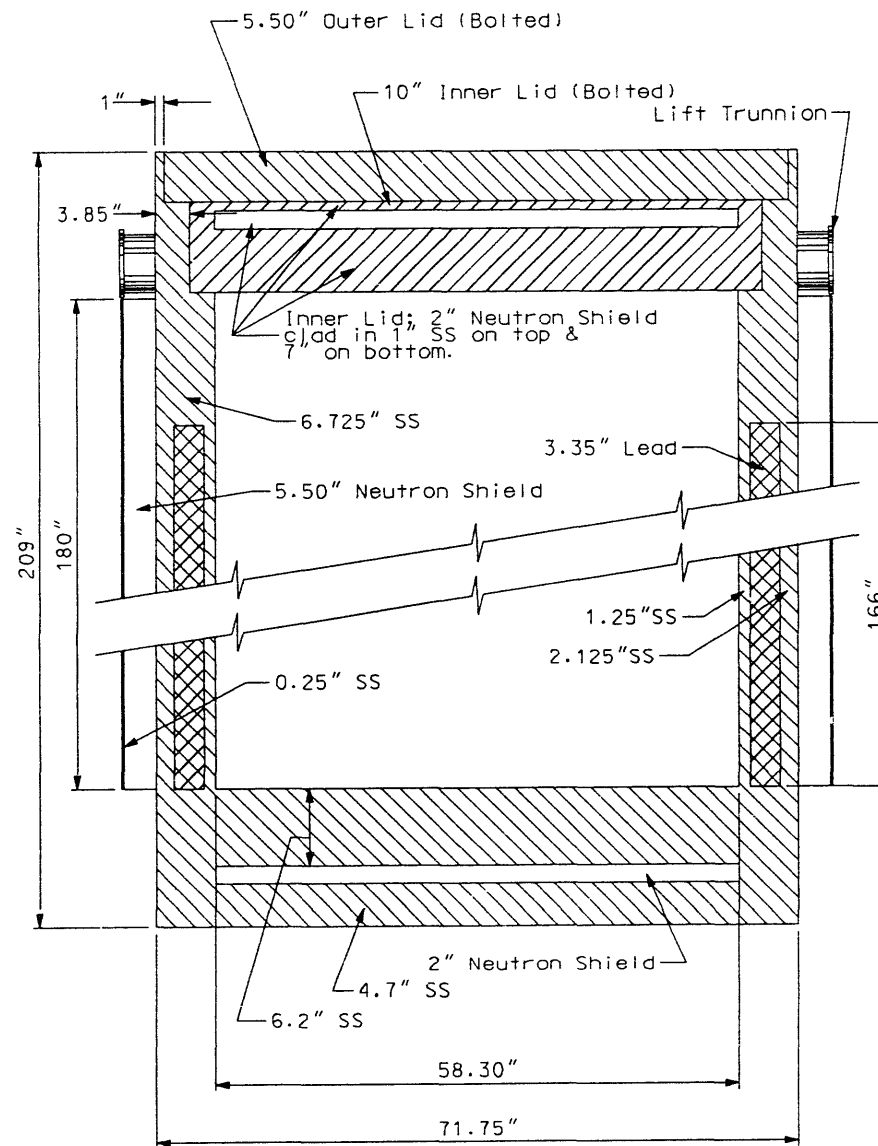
100-Ton TSC Metal Cask (Side Section View)
